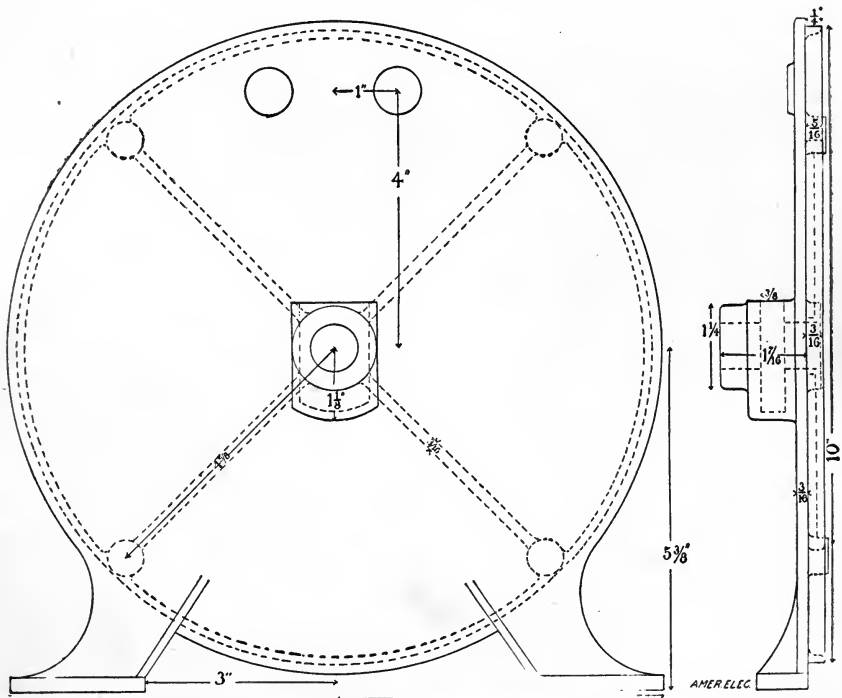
FACE AND EDGE VIEWS OF AN END DISC.
